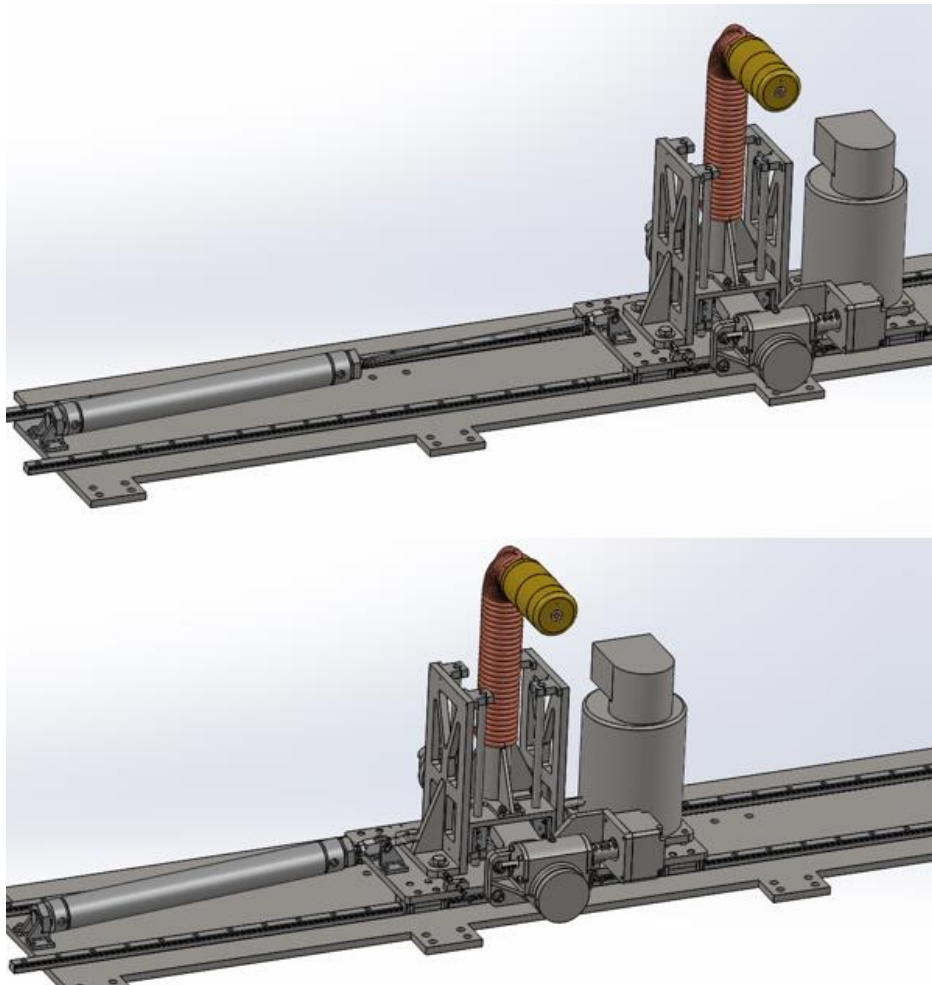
CAD assembly of insertion platform using pneumatic actuation.
